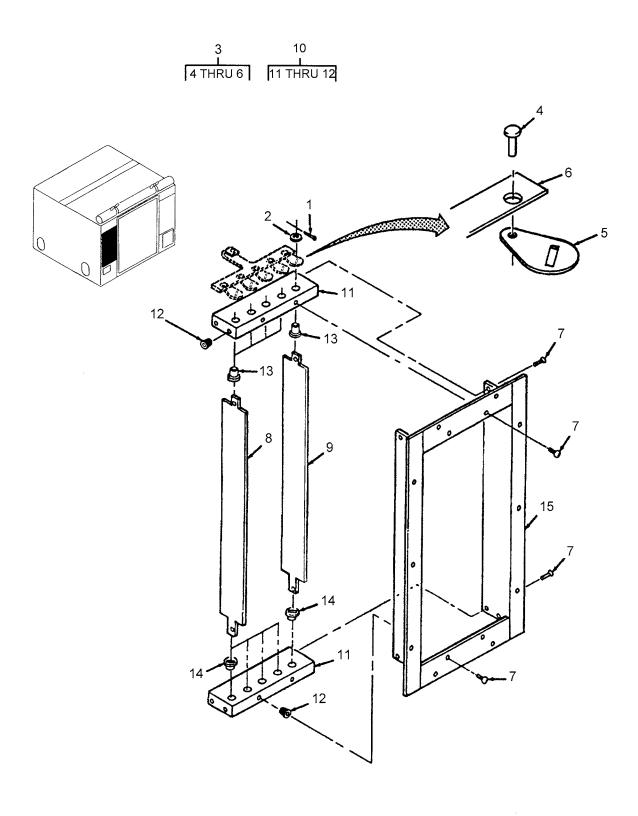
Condenser Air Exhaust Louver Assembly (Right)
